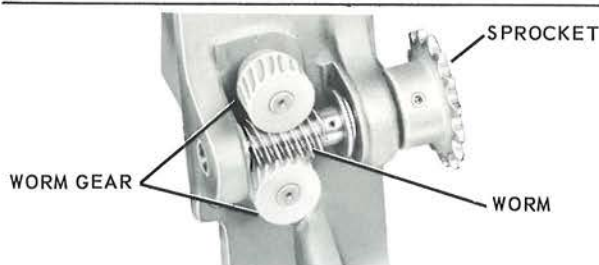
DETECTOR ROLL ASSEMBLY (DRIVE END)
